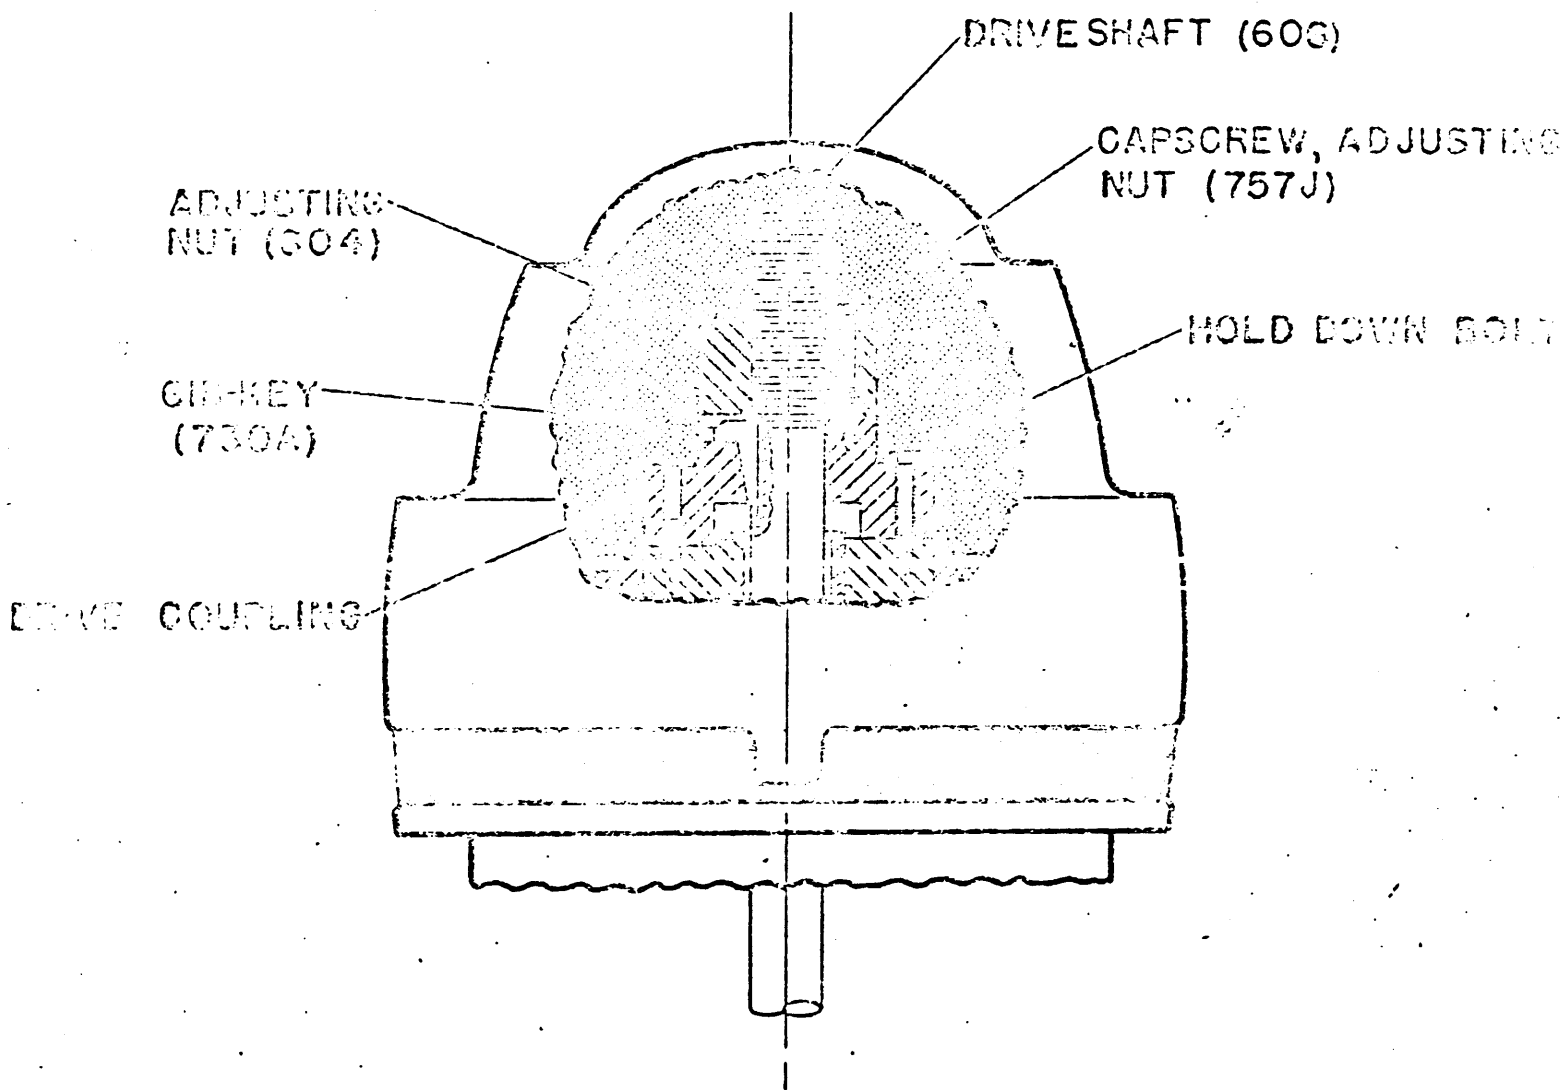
HOLLOW SHAFT ADJUSTING NUT.
